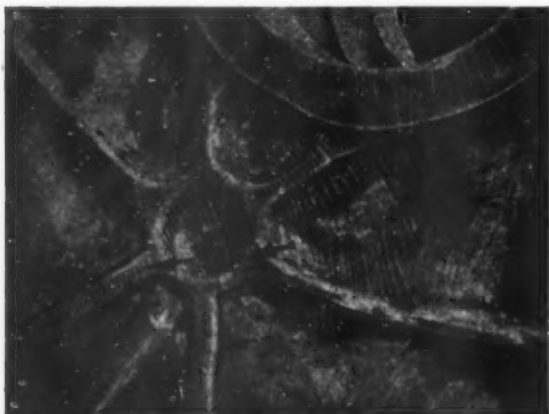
Cracks in the lacquer layer on engine parts under static loading.
